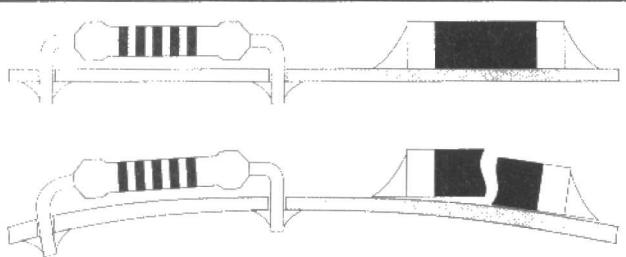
If a surface-mount board does flex, the leadless components may be damaged because, unlike through-hole components, there is no lead to take the strain. But when the pros and cons are evaluated, surface mounting is the clear winner for rugged equipment.
